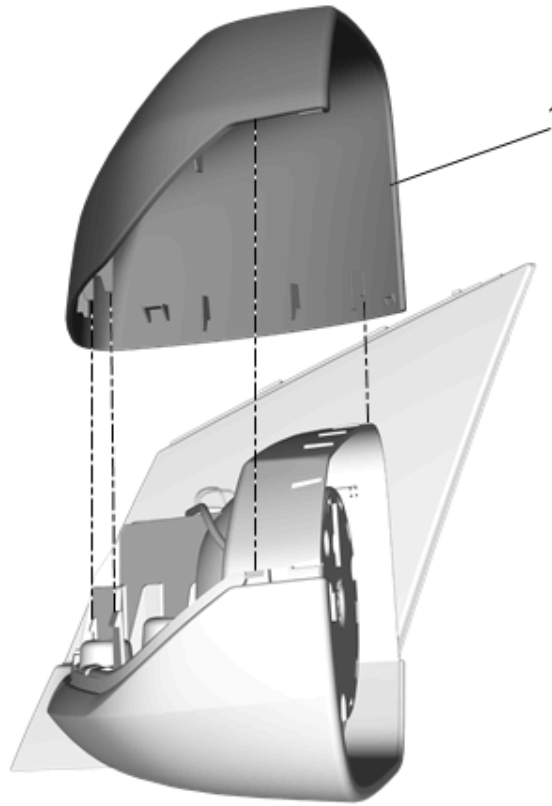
Outside Rearview Mirror Housing Upper Cover
